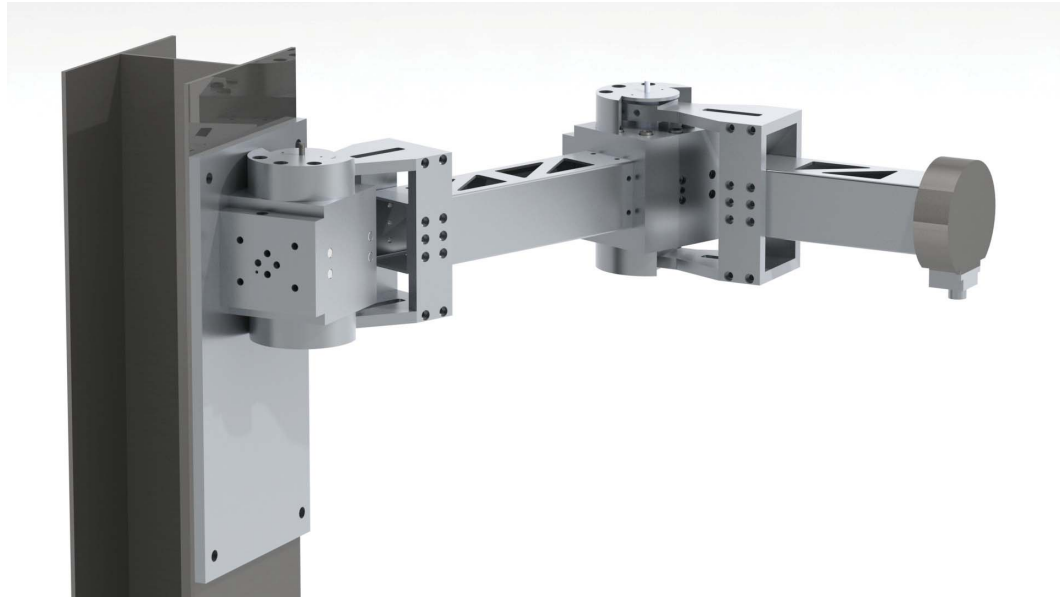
View of the SCARA arm proposed for fabrication in Solidworks Real View Graphics
